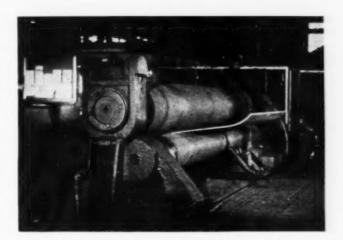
Plate being cold-rolled after crimping longitudinal edges in dies
